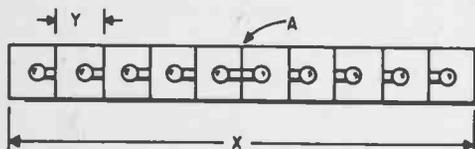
Drawing shows division of indicator box; table gives proportionate dimensions.
